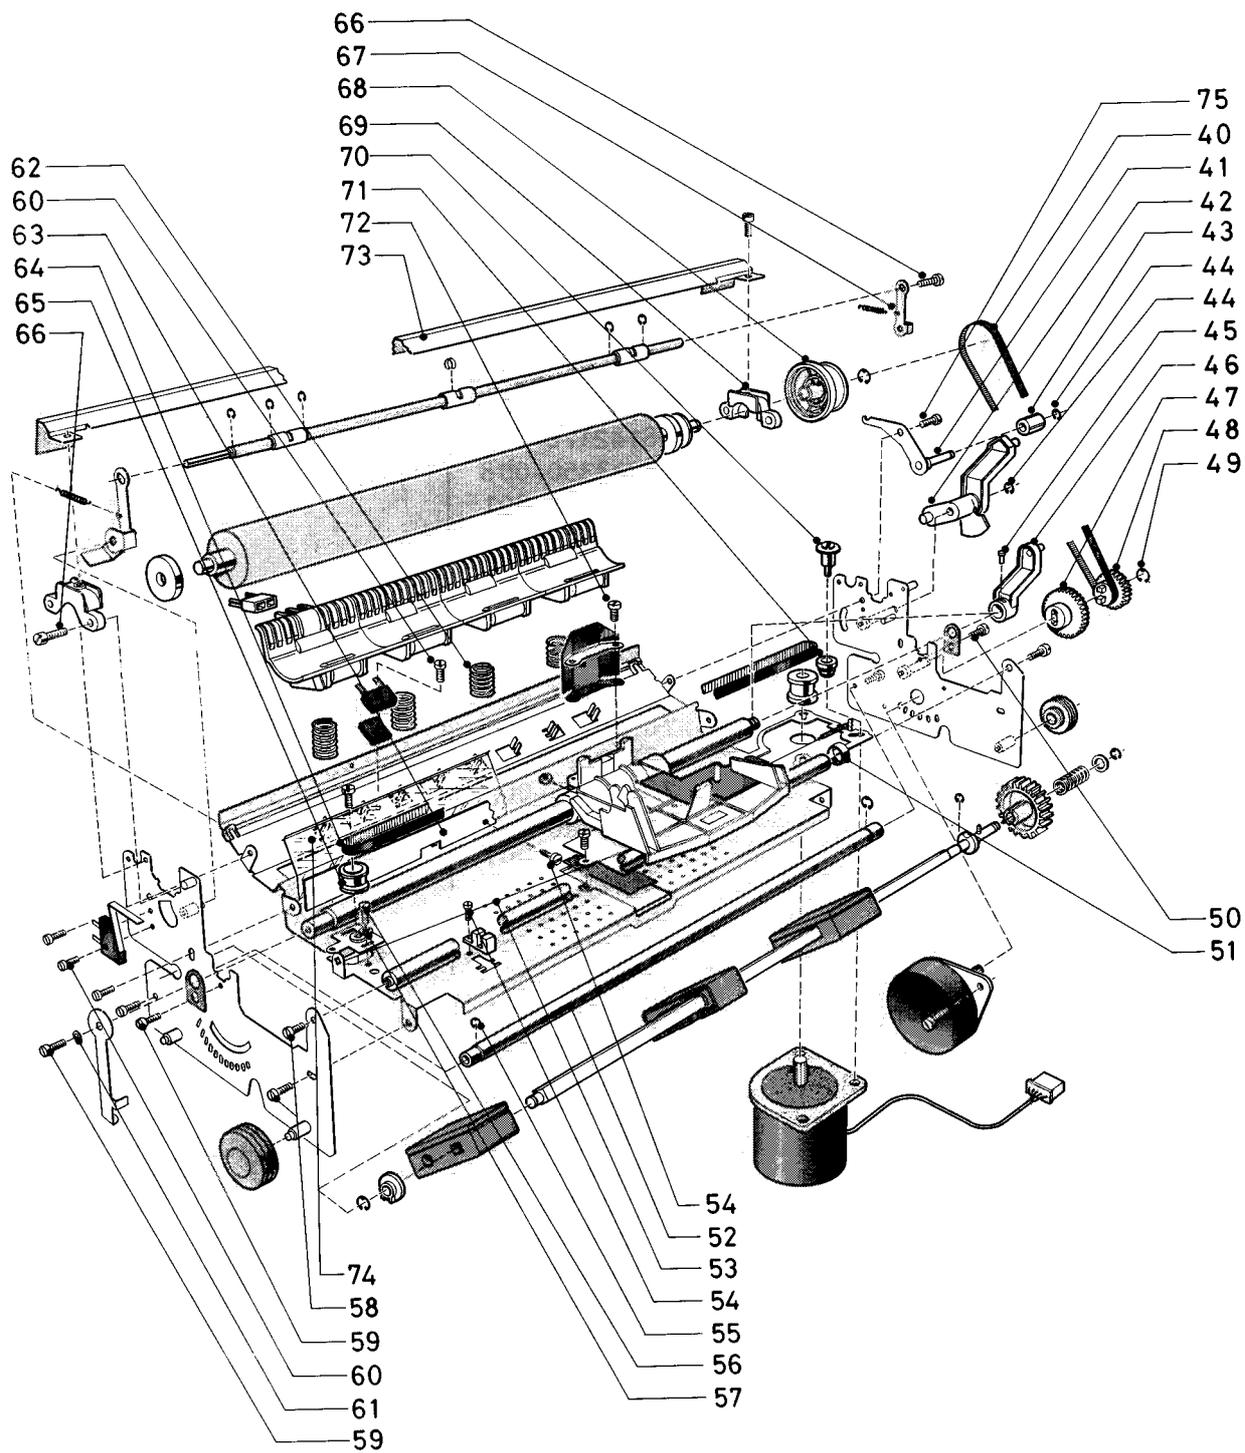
(cont.). 4-40 Mechanism General Assembly
